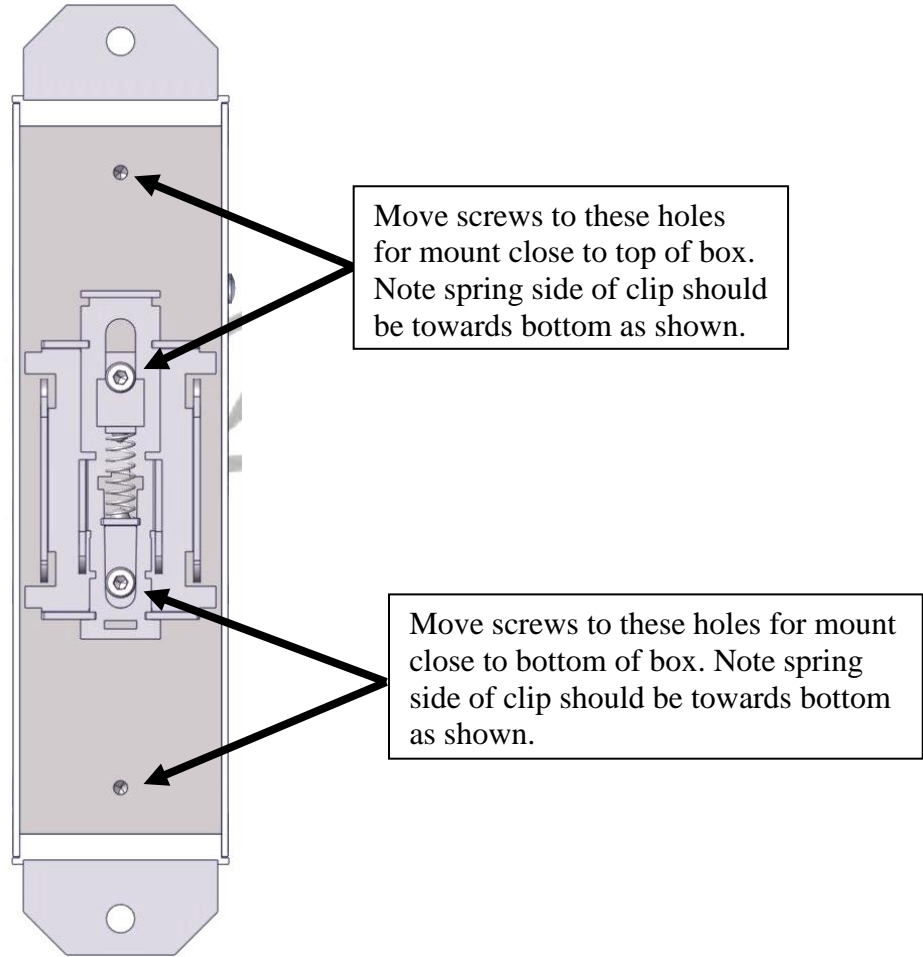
View of rear of base. DIN Rail Mount comes centered but may be adjusted higher or lower by inserting screws in lower or upper set of holes instead of center holes.
